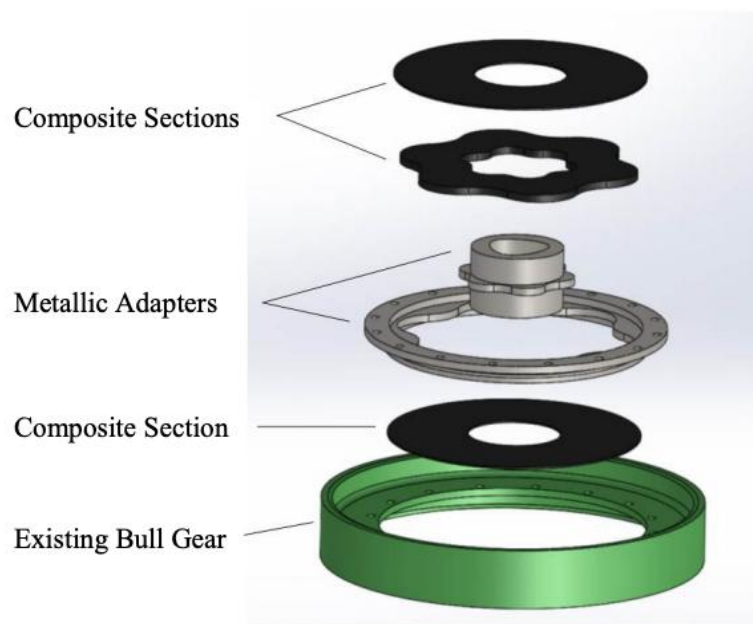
Exploded view of hybrid bull gear design (Fig. 2 of LaBerge et al. [2016]).
